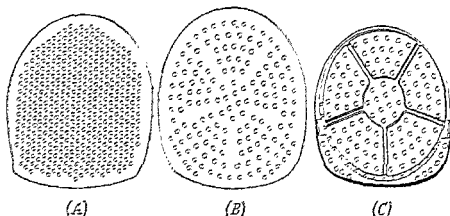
Redesign of perforated bulkhead: (A) old design; (B) new design; (C) subsequent forming.^a
